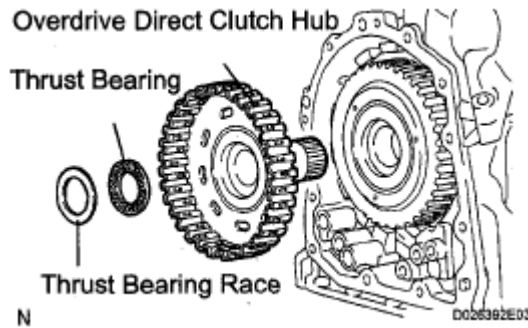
Identifying Thrust Bearing Race, Thrust Bearing And Overdrive Direct Clutch Hub
